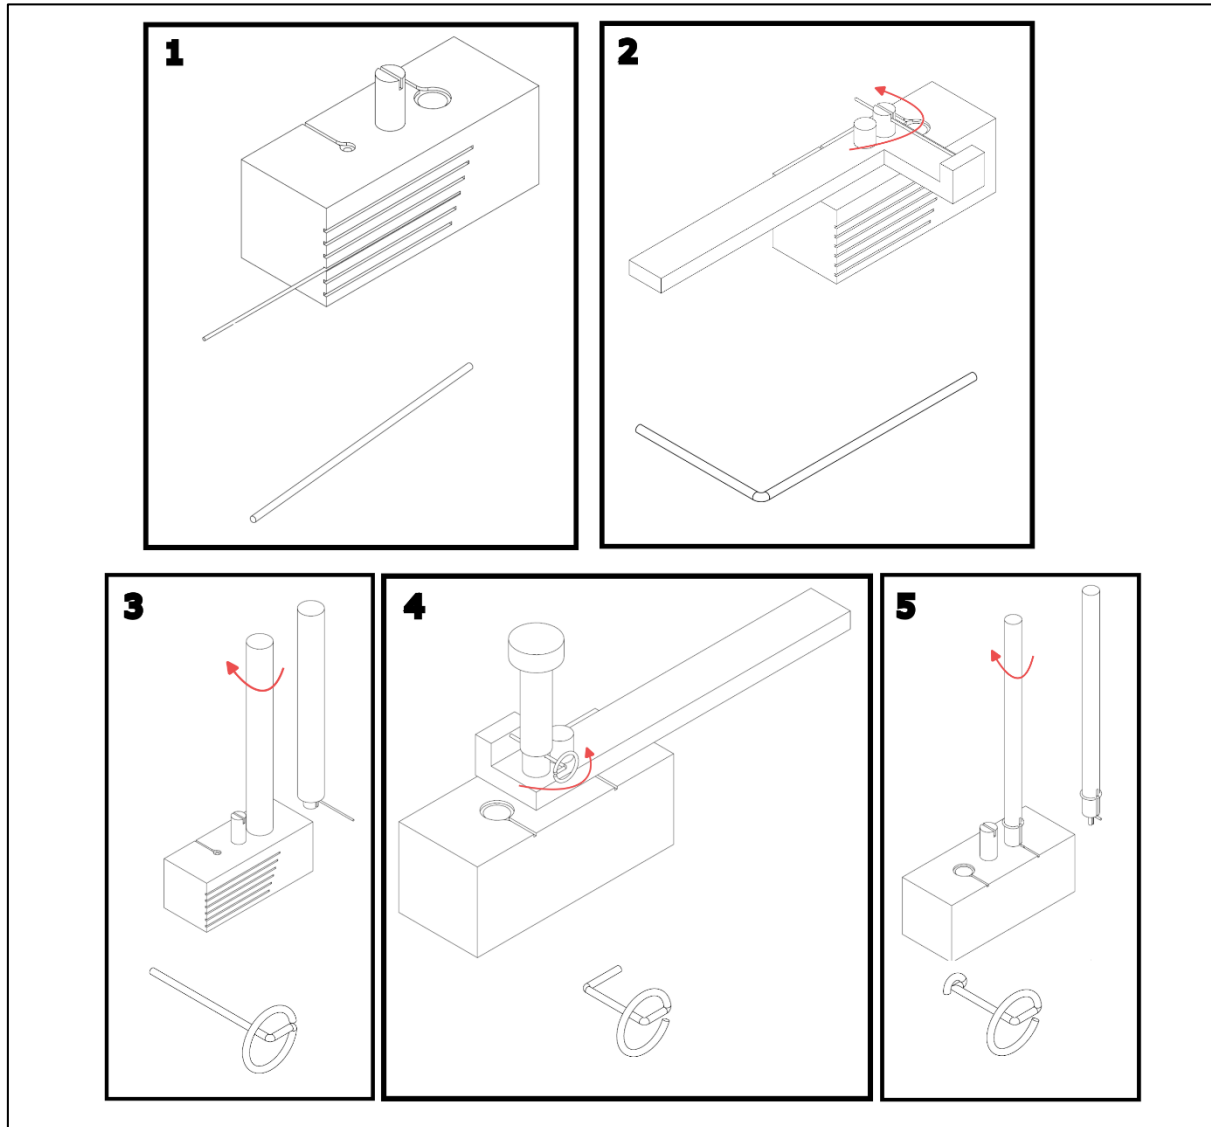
Designed forming procedure. Step 1 : Cutting of the wire at the desired length. Step 2 : Bending the wire used to form the head by turning 90degreeRh anti-clockwise. Step 3 : inserting the formed wire into Rh and forming the head by turning Rh clockwise while Rh is inserted into the forming block. Step 4 : Bending the wire used to form the foot by turning 90degreeRs anti-clockwise. Step 5 : clicking the formed wire into Rs and forming the foot by turning Rs clockwise.
